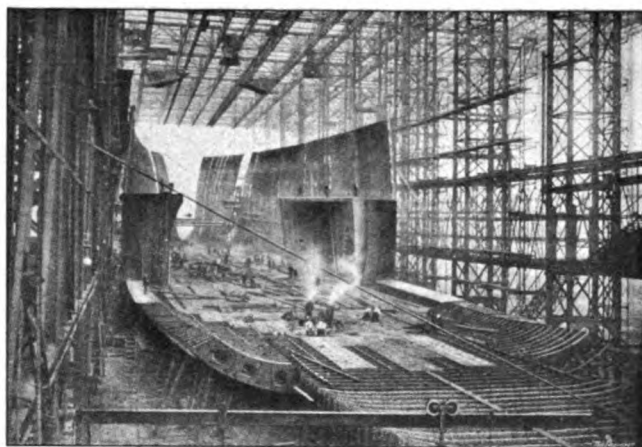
FORWARD PORTION OF FRAMING ERECTED, AND INNER BOTTOM PARTLY PLATED.
